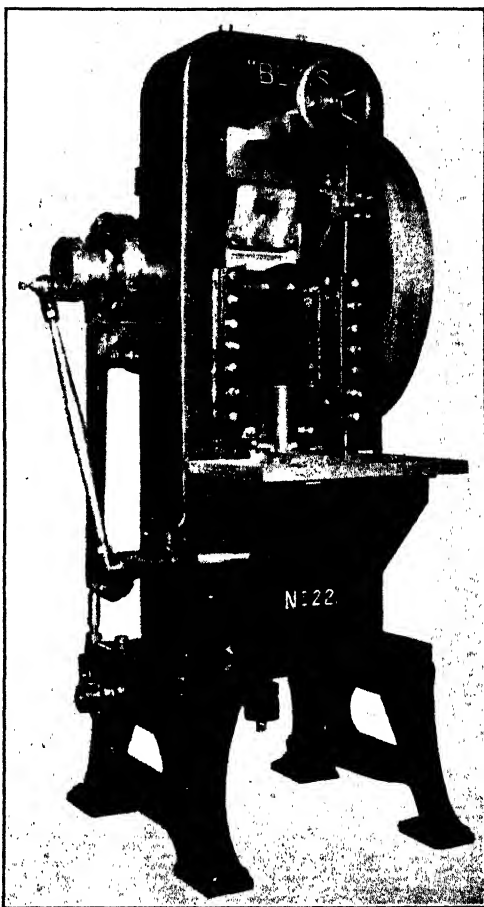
The 150-ton coining press of recent mint equipments, equipped with automatic coin feed and cam knockout.
